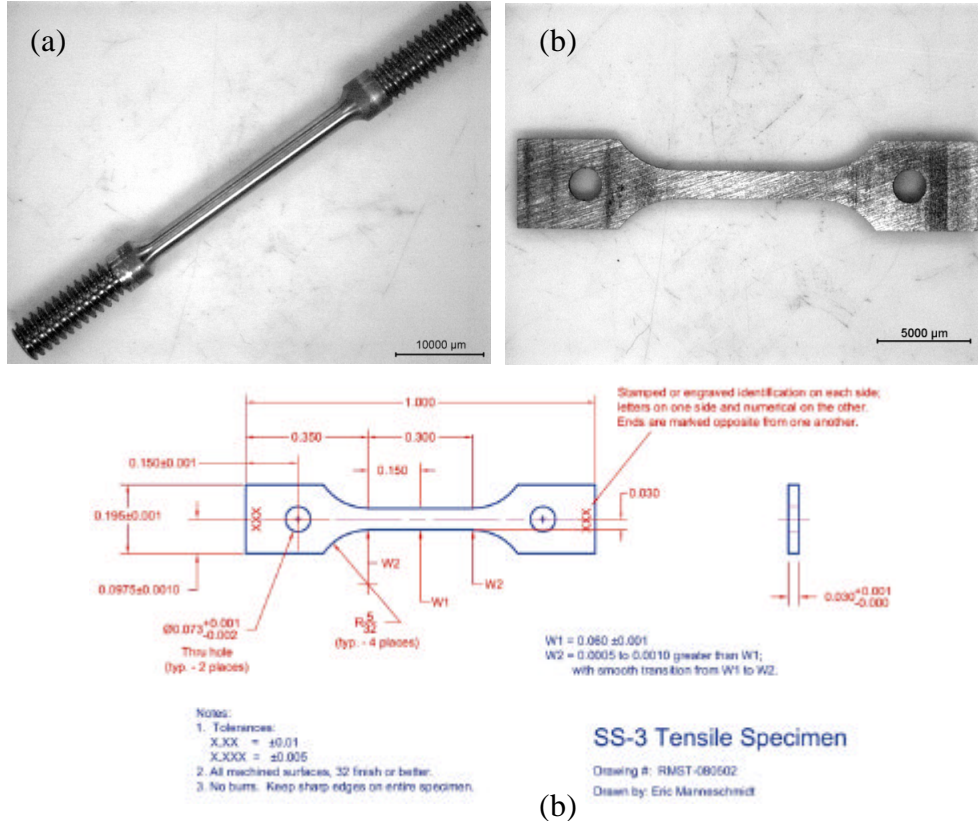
Optical images of (a) mechanically machined creep test specimen with round cross-section, and (b) wire-EDM (Electro-Discharge Machine) fabricated tensile test specimen with rectangular cross-section. The design of the tensile specimen (b) is also included.
